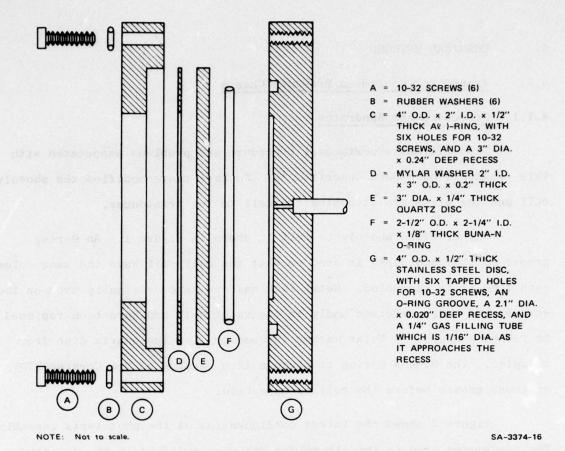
EXPLODED CROSS SECTION OF PHOTOLYSIS CELL.
